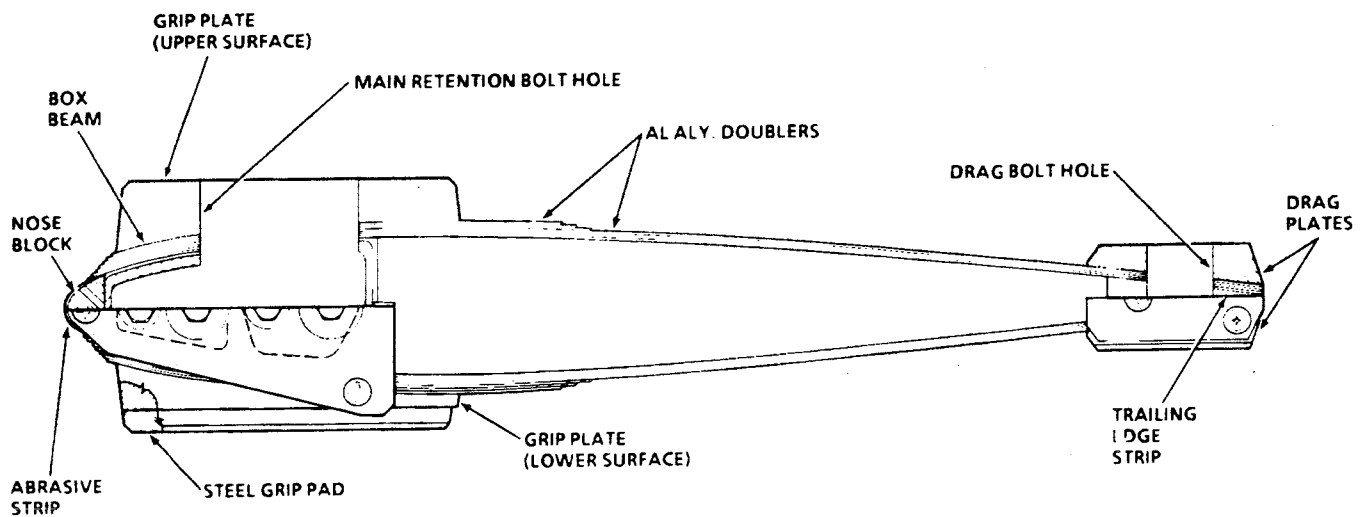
Repair of Main Retention Bolt Hole and Drag Bolt Hole
